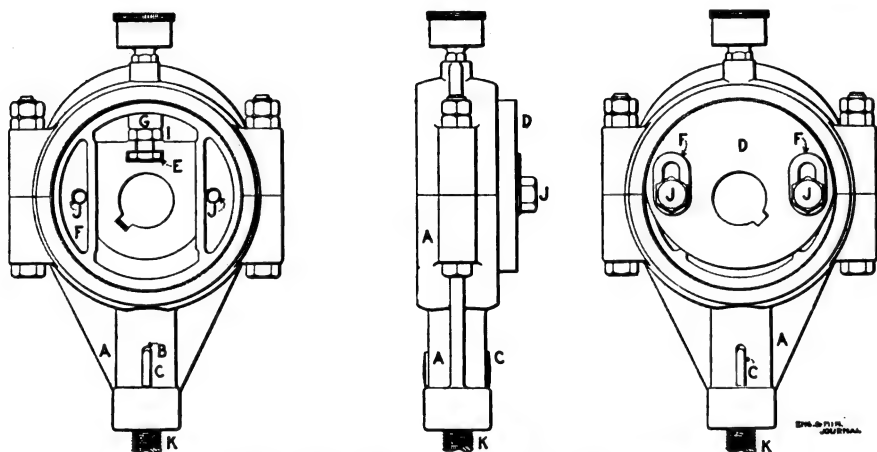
THE OVERSTROM SAFETY JIG ECCENTRIC.
